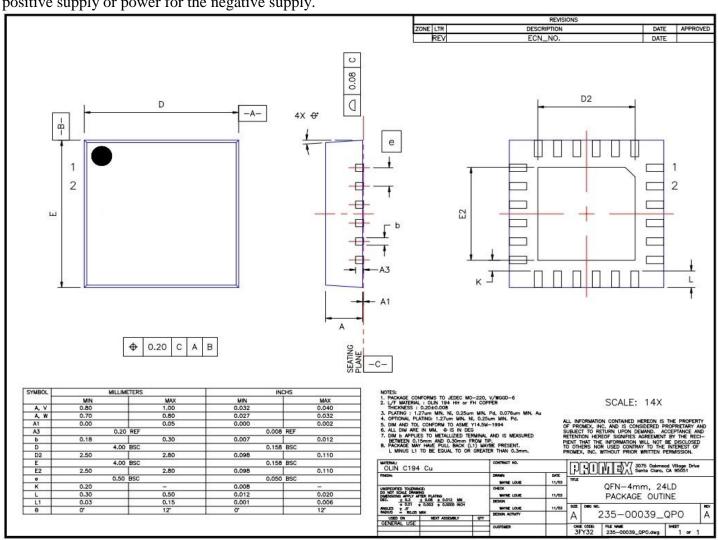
QFN 24-Pin Package Drawing (All Dimensions in mm)
